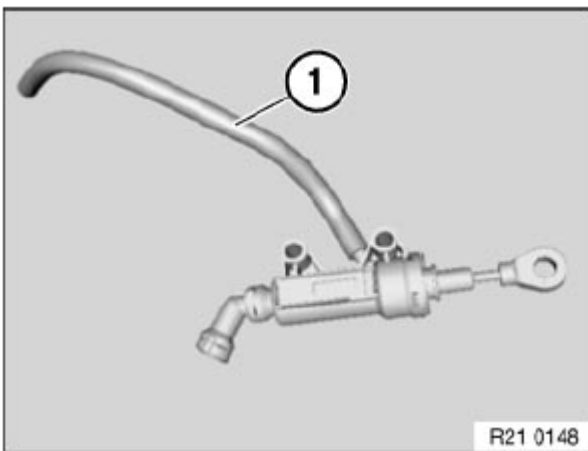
Identifying Supply Hose From Clutch Master Cylinder
